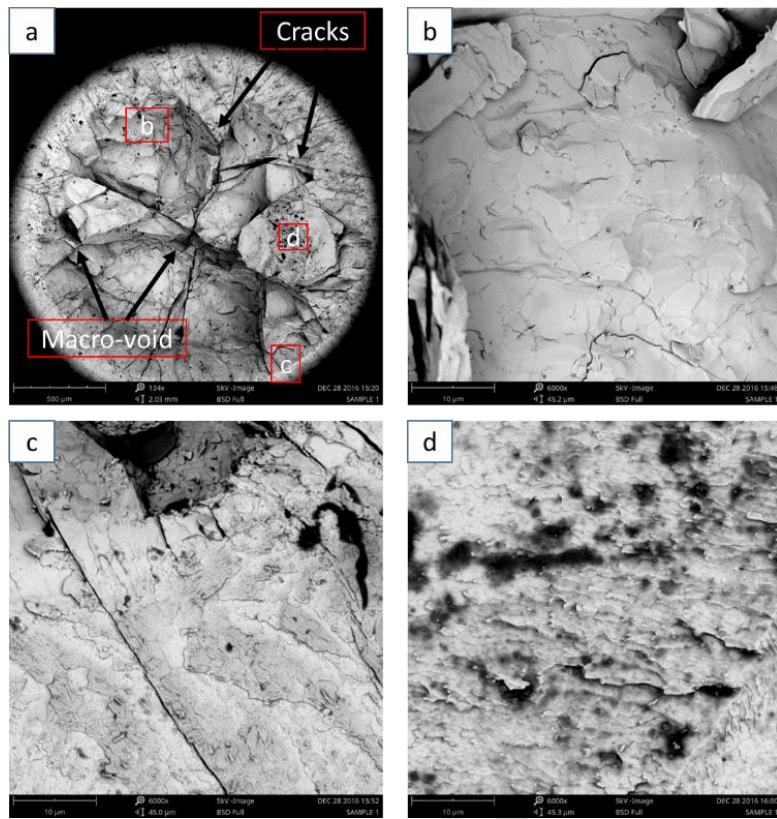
Fracture surface of ASS 316L side of the μ RSW joint
